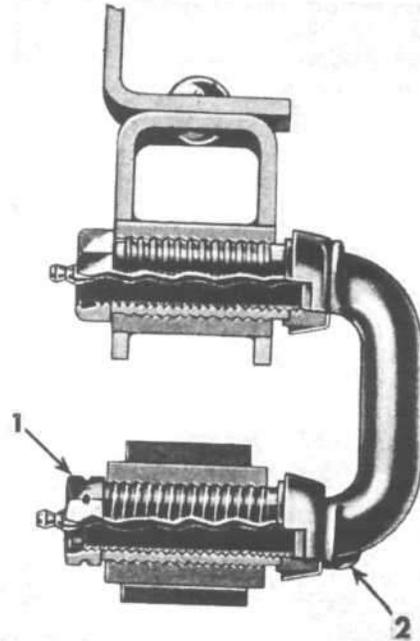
FRONT SPRING SHACKLE (EARLY VEHICLES)
